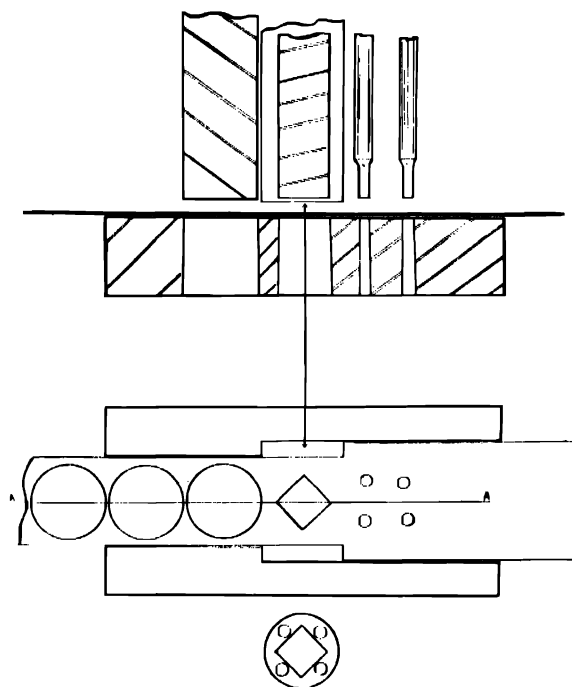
Press tool fitted with trimming punches as a means of locating strip.
